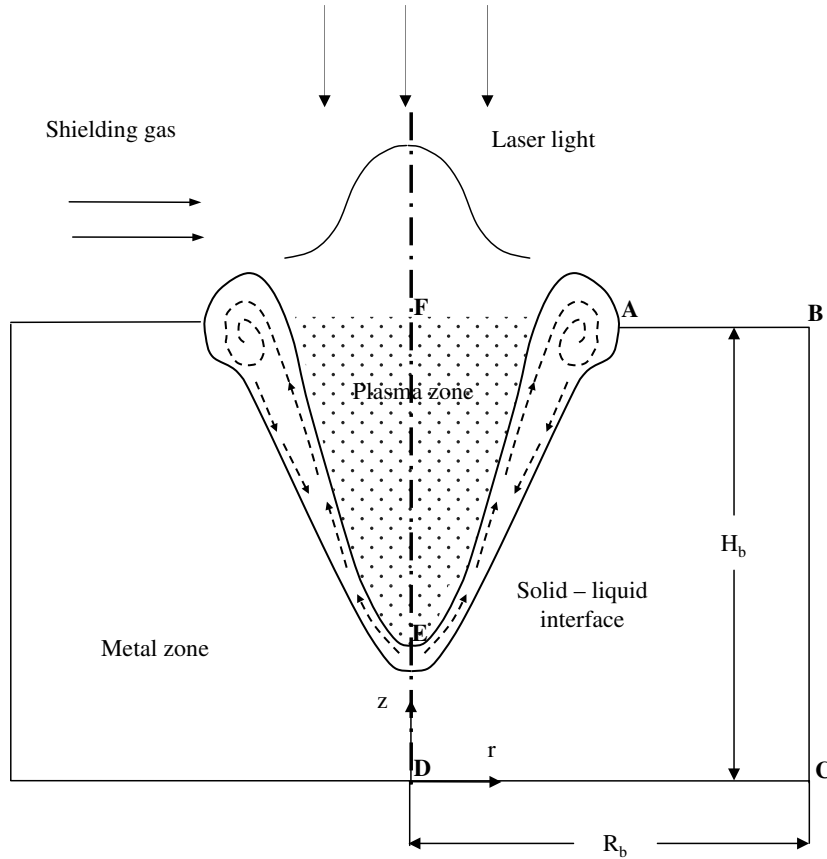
Schematic sketch of the pulsed laser keyhole welding process.
